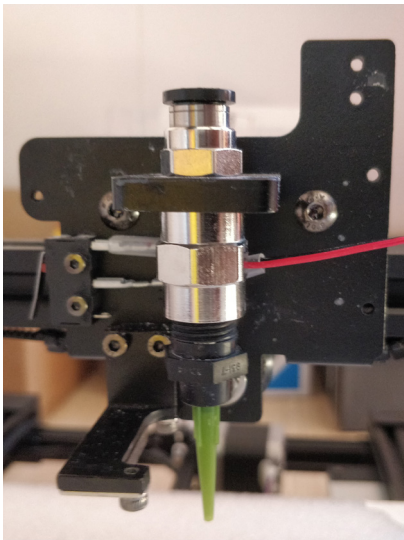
Modified paste extruder mounted onto 3D printer gantry. Source: Author.
